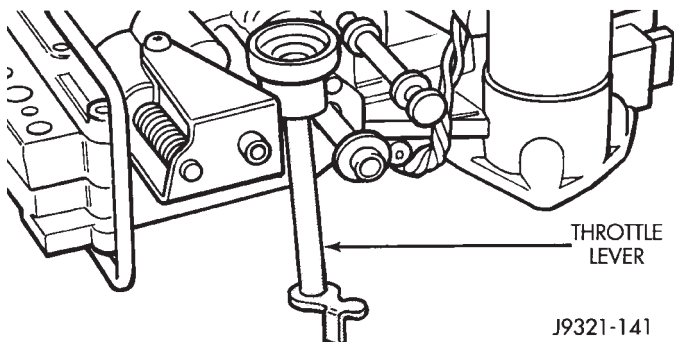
Detent Ball And Spring Removal (42RH)
